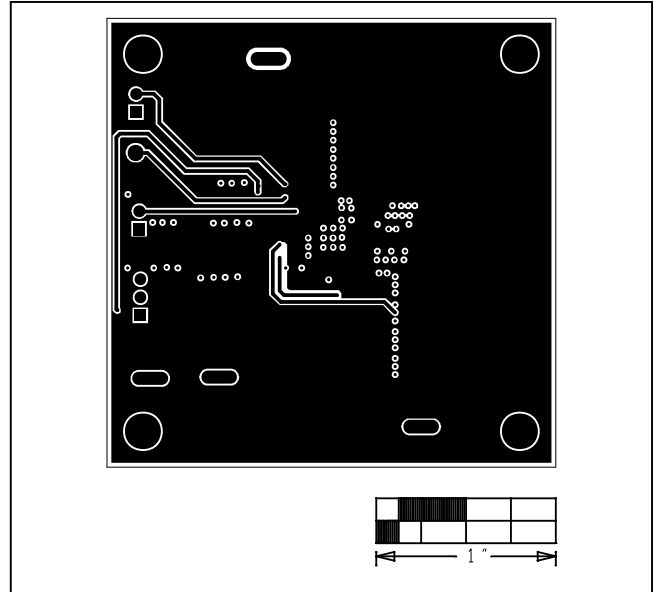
MAXM17544 EV Kit PCB Layout—PGND Layer 3
